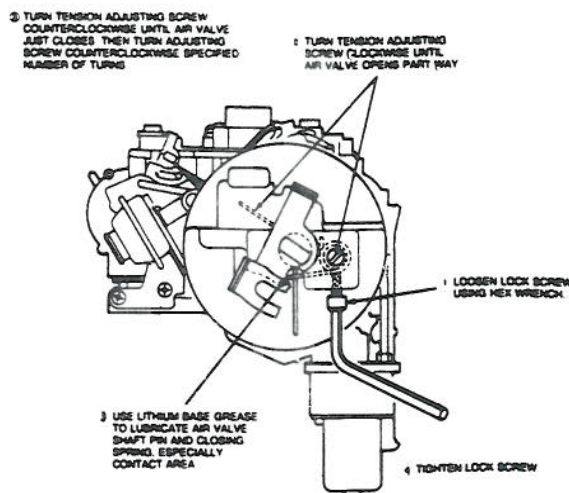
Air valve spring adjustment. 1982-84 E2SE carburetor
